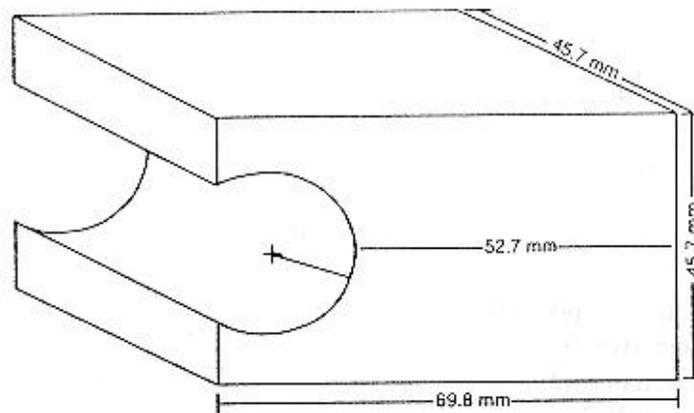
Cleavage specimen dimensions. Half the specimens were tested so that crack propagated in the radial plane; the remaining half were tested so that crack propagated in the tangential plane. Radius of notch was 12.5 mm.
